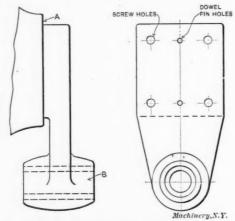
A Case where the Bushing Hole is Bored Previous to locating and fastening Bracket on Jig Body.
